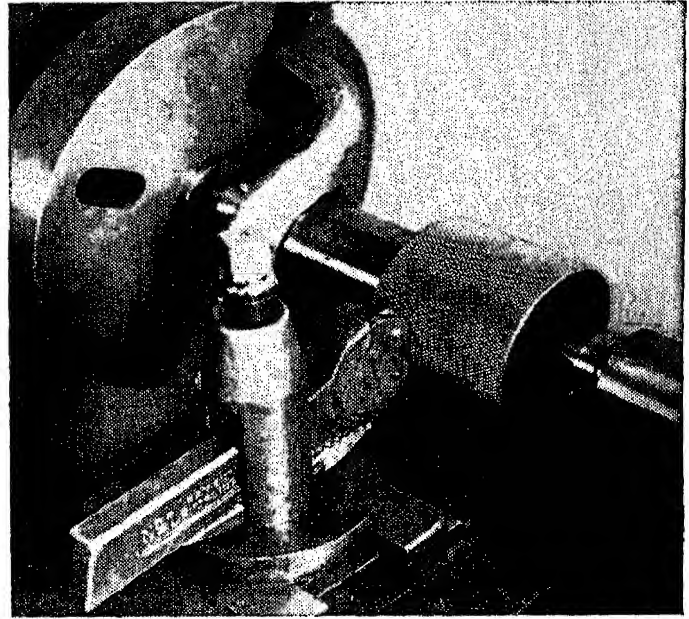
Knurling a piece in a lathe. (Courtesy South Bend Lathe Works.)
